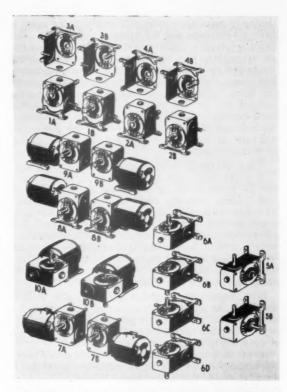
Alternative mounting positions for Universal type worm gear unit.
